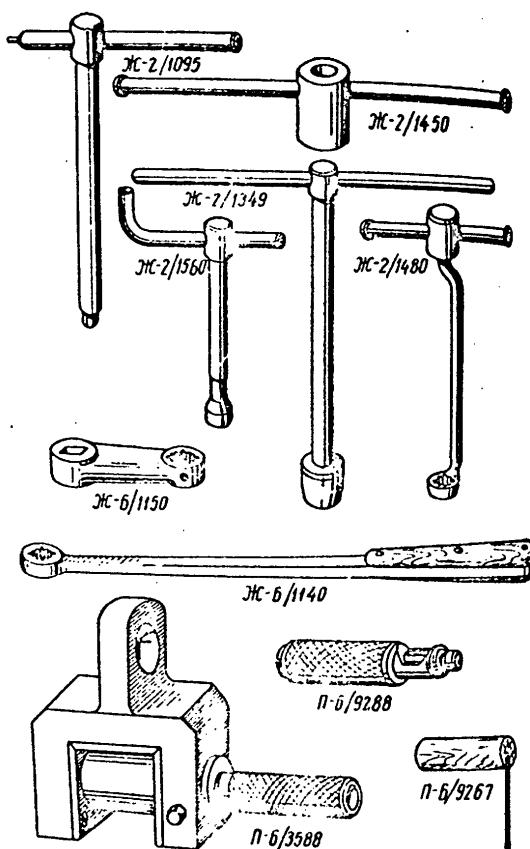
TOOLS AND FIXTURES FOR ASSEMBLY OF CRANKSHAFT
